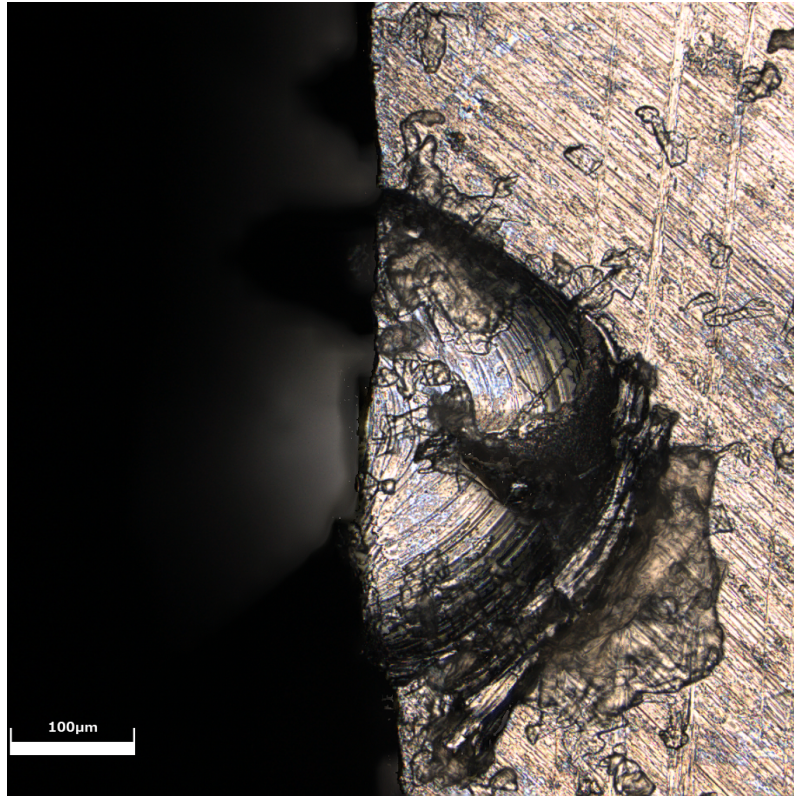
Failed attempt to manufacture slot 18 because of tool breakage.
